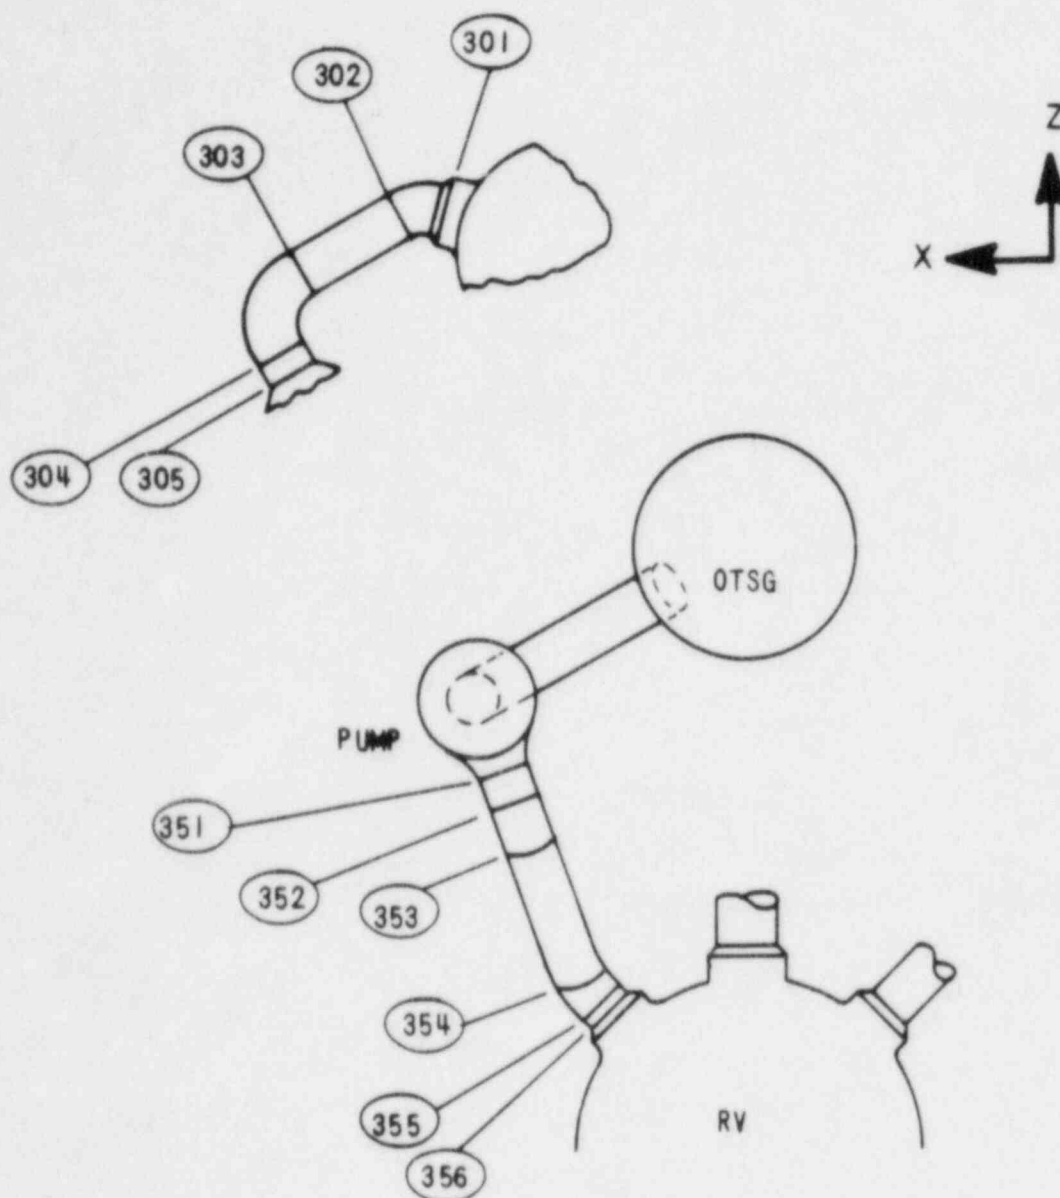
177-FA Plant Raised Loop Weld Locations
